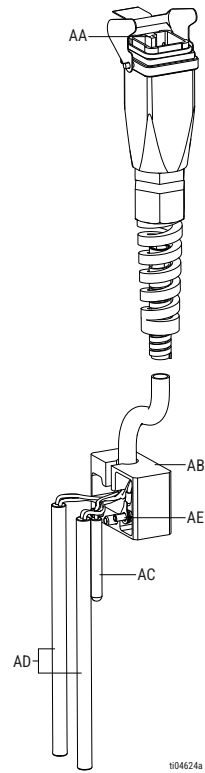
Heater Assembly (for 200 mm Outlet Block), 15N030
